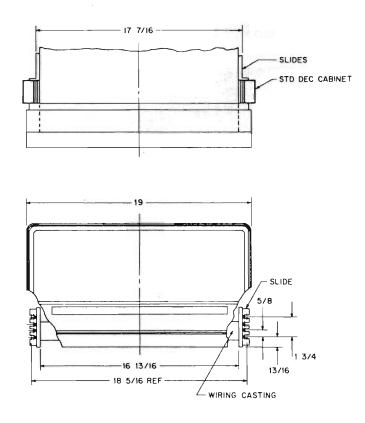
Dimensions, PDP-8/S Mounted in Standard DEC Rack
